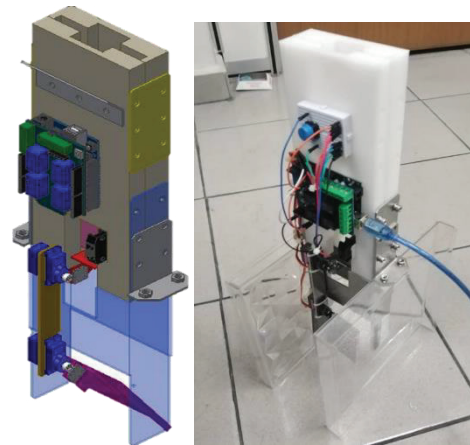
Full system design using Solidworks and fabrication the prototype of VDB system
